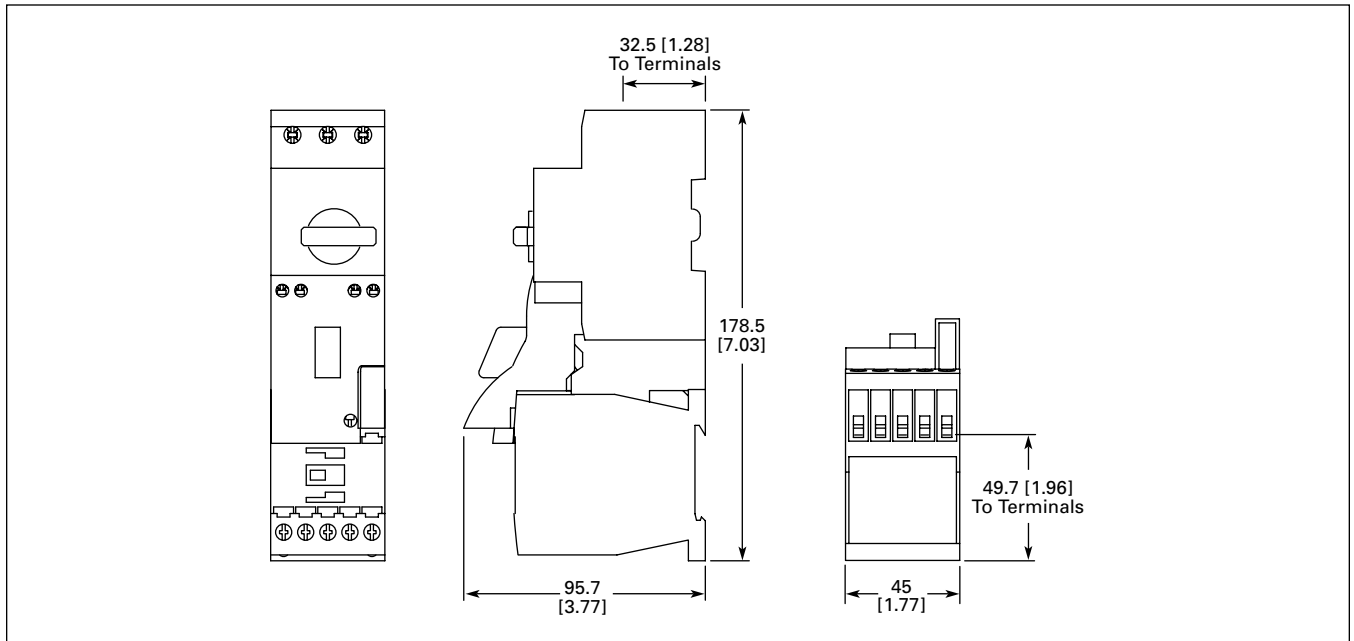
XTSC...BB_ — Approximate Dimensions in mm [in]
